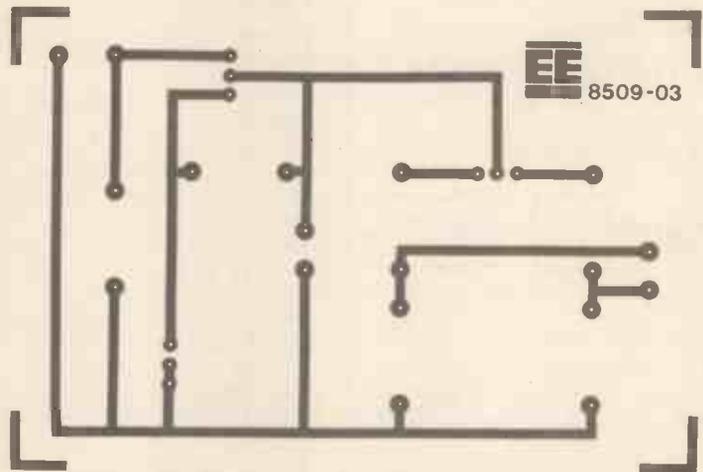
Full size printed circuit board master for the Resistance Thermometer. This board is available from the *EE PCB Service*, order code: 8509-03.
